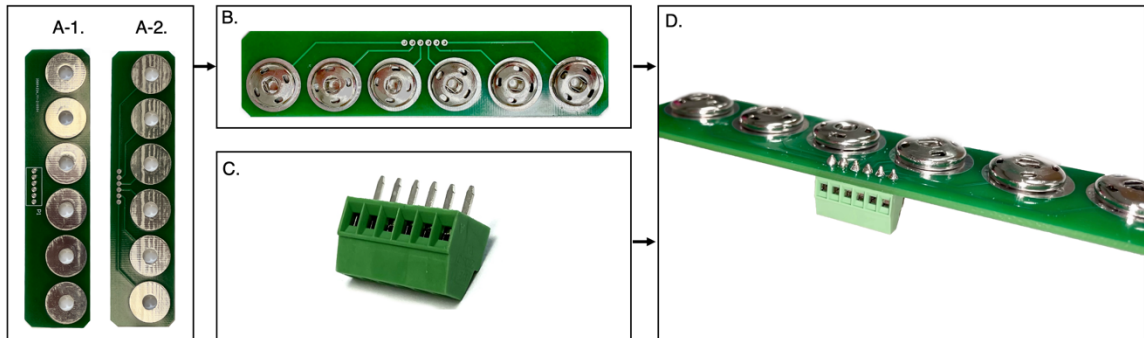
The structure of the electrode plate: (A-1) PCB side 1; (A-2) PCB side 2; (B) PCB soldered with six metal snap fasteners; (C) terminal block; (D) assembled electrode plate.
